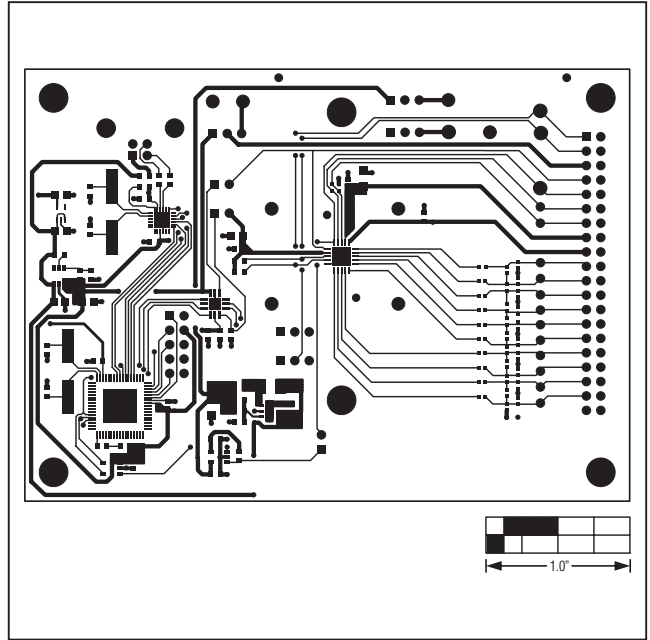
MAX9667 EV Kit PCB Layout—Component Side
